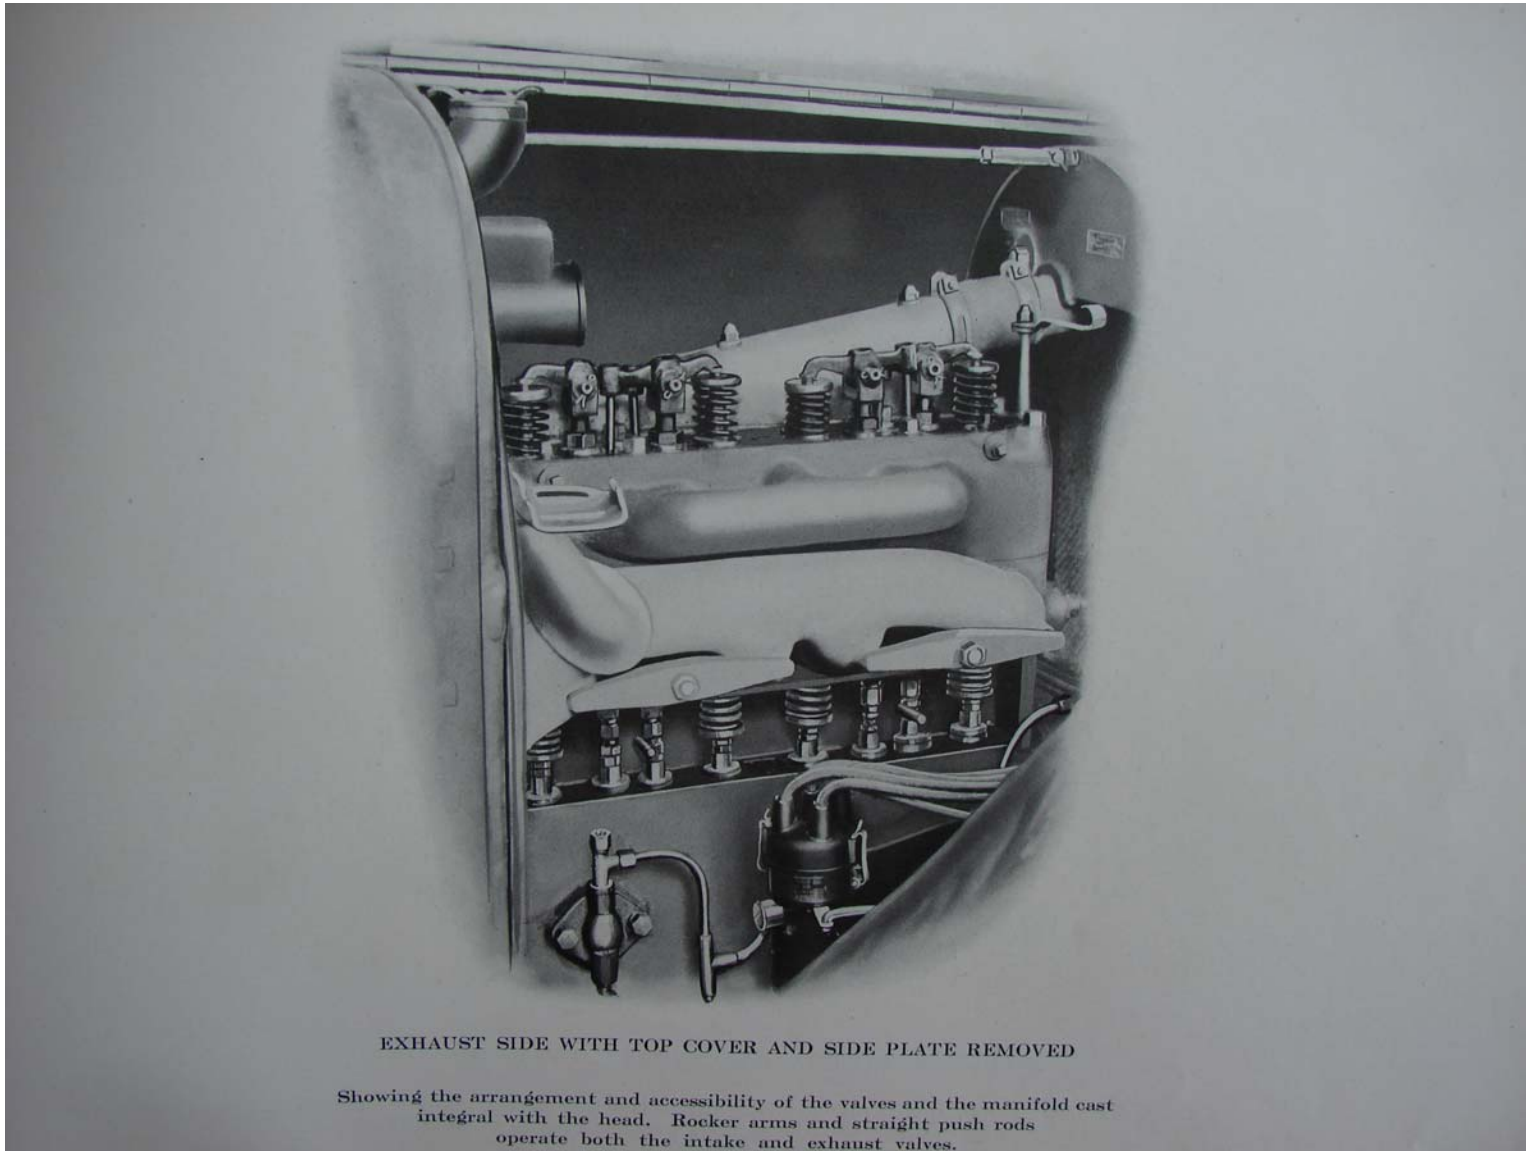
DETAILED DRAWING OF THE PAN-POWERED MOTOR
